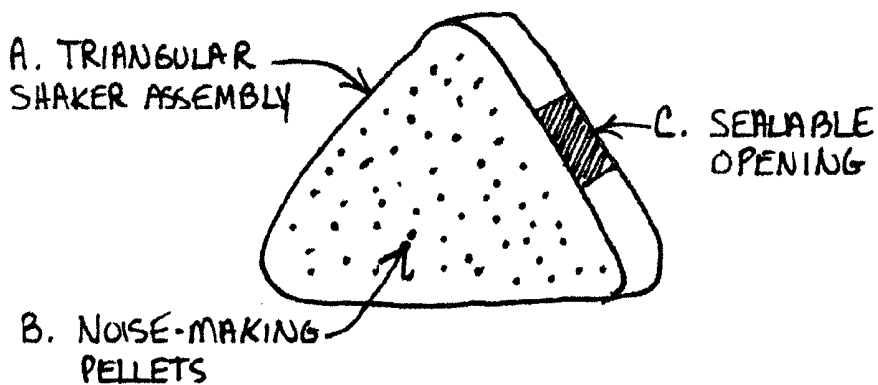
E WAVE or ODD SHAPED SHAKER ASSEMBLY
